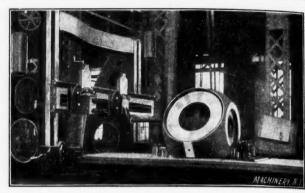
Cutting keyway in seven ton propeller hub. Reach of tool about four feet.
